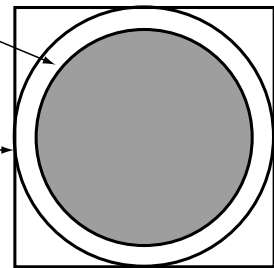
Footprint - 5 mils stencil - solder mask defined
